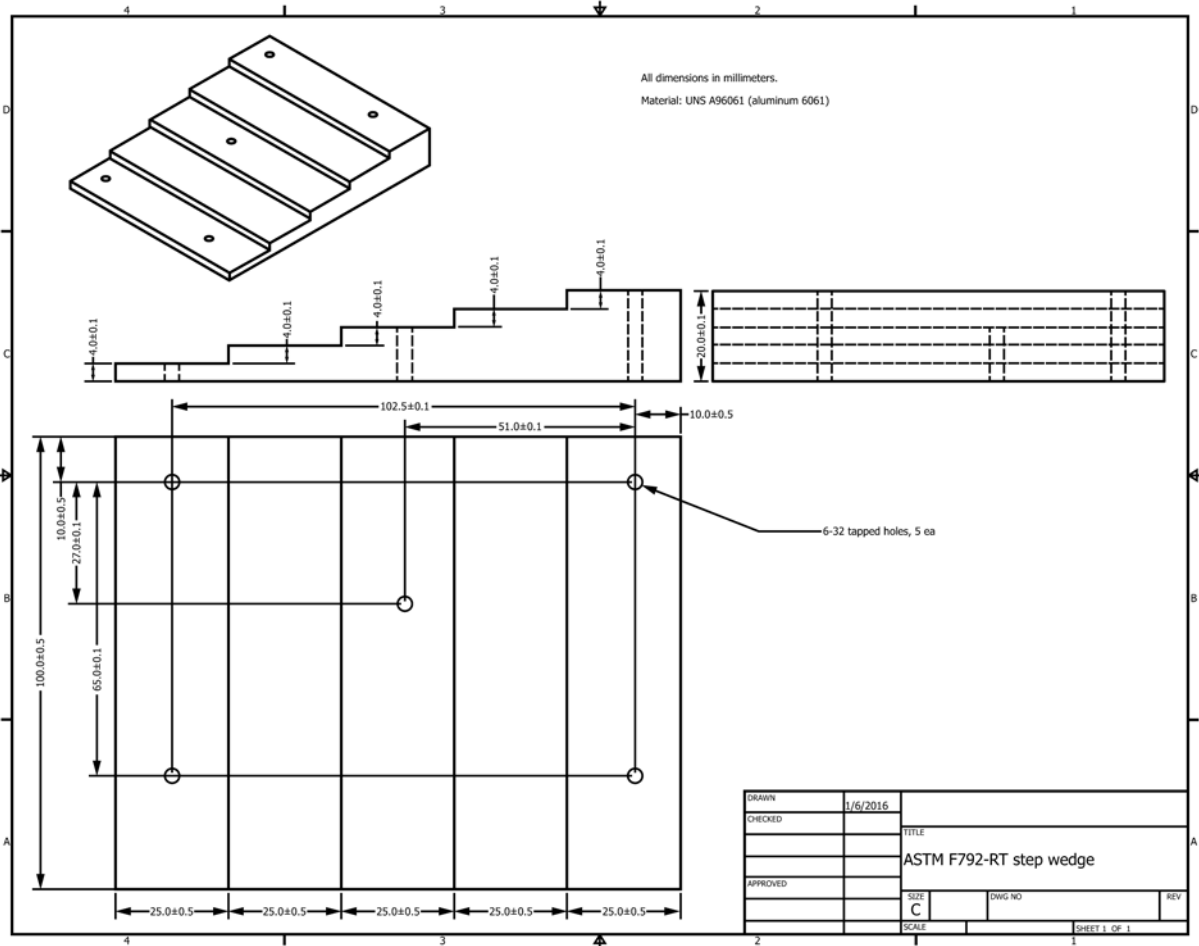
Mechanical Drawing of the Practice F792 - RT Step Wedge
